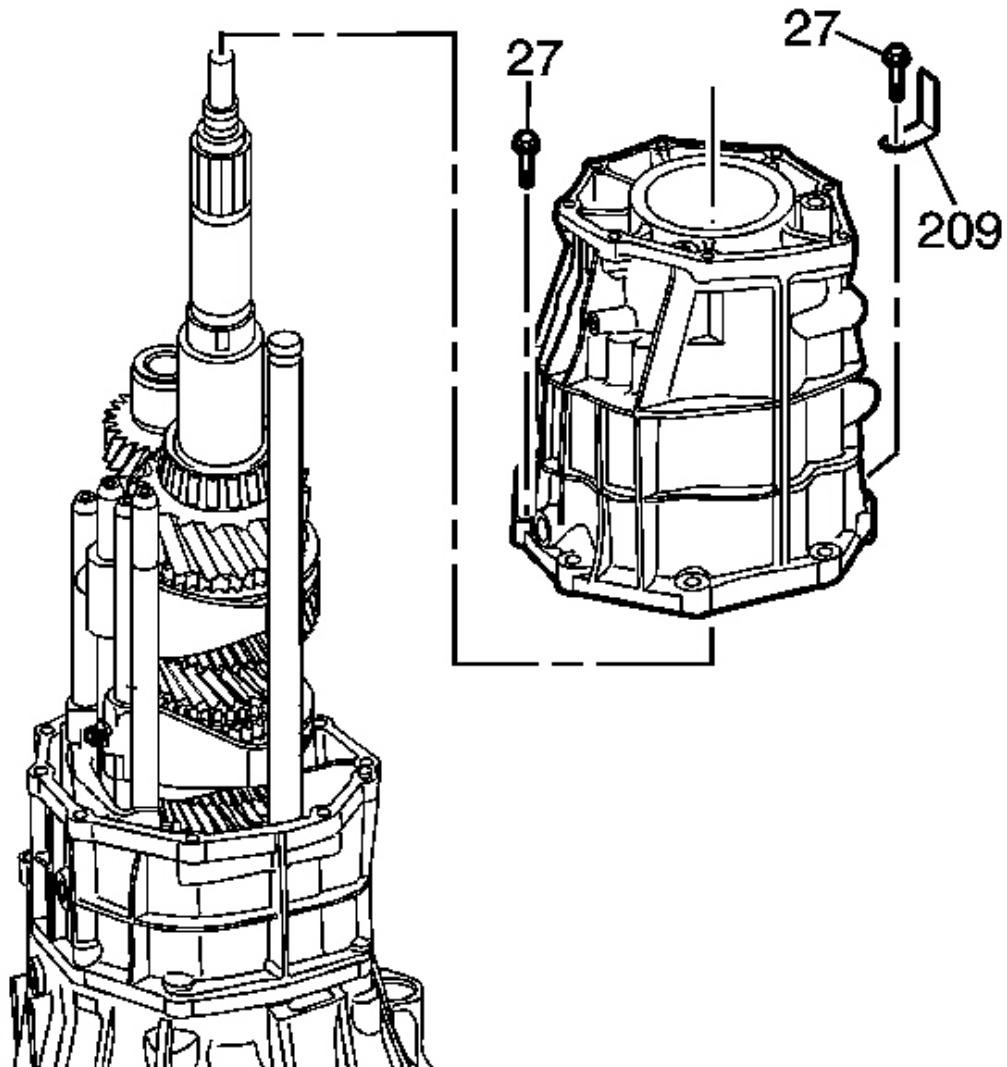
View Of Rear Case Housing Retainer & Bolts
